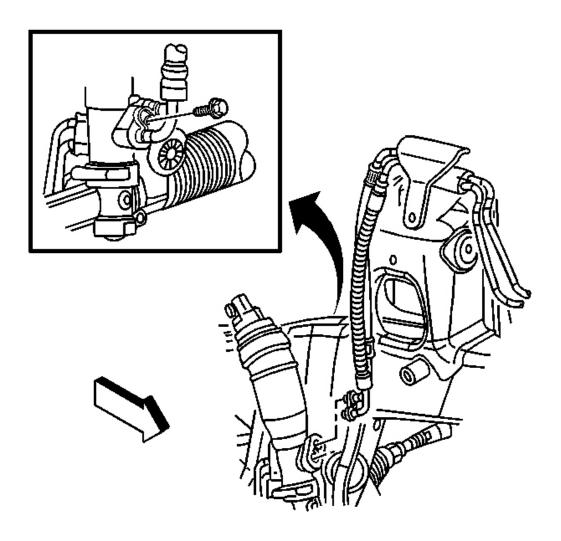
View Of Power Steering Hose Assembly To Gear Retaining Bolt Courtesy of GENERAL MOTORS CORP.
